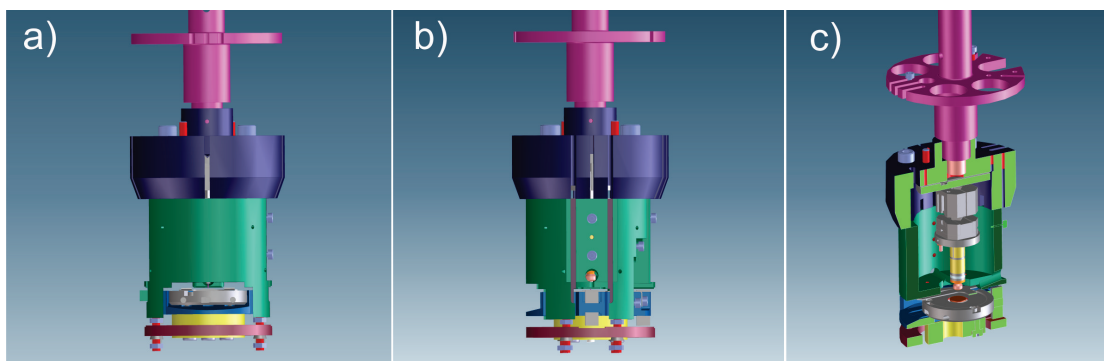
CAD drawing of the STM-Head. a) Front view with the sample-holder (gray color) inserted. b) View from the side c) View on the inner part
